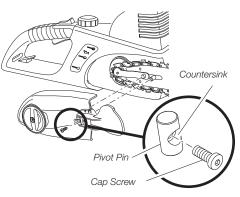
Inserting Low Head Cap Screw into Pivot Pin
